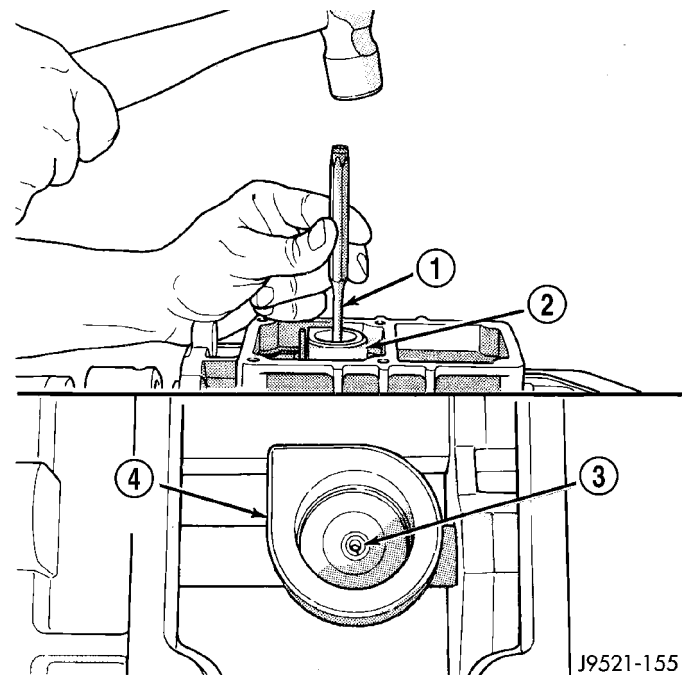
SEATING SHIFT SOCKET ROLL PIN
